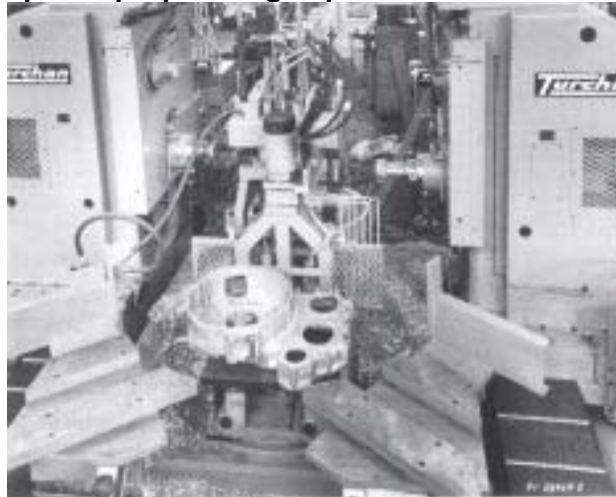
Duplex system machines aluminum flywheel housings @ 10,000 SFM (1975)
